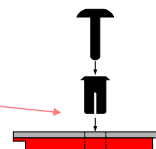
Show how the Red Spacer & the 5 rivets are inserted on replacement panel
